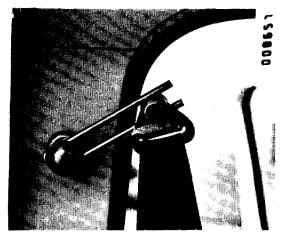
TORSO BELT ANCHOR MODIFI-CATION - CHEVROLET C-10 PICK-UP TRUCK.
